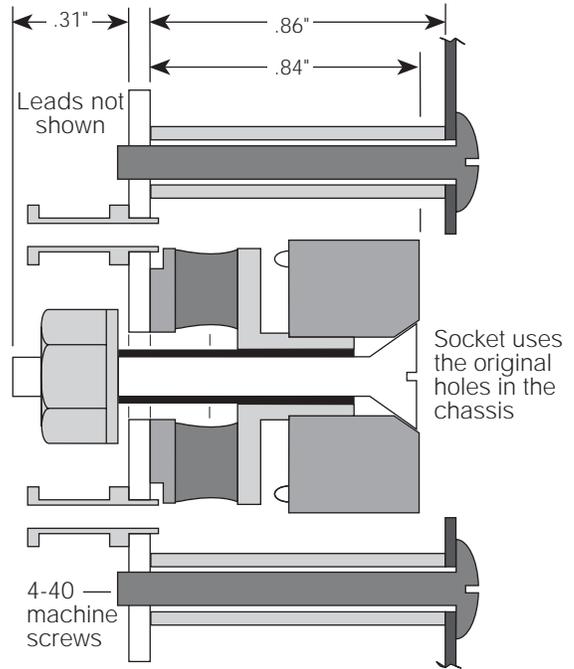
The standard profile, chassis mounting, horizontal ISO-SOCKET is shown above. The contacts are silver plated brass, the socket body is white ceramic and silicone foam is used for the decoupling elastomer. The socket is supplied fully assembled with the flex leads threaded through the holes in but not soldered onto the hollow, turret terminals. Note that the insulation on the leads is solder strippable. See AN 7.1 *ISO-SOCKET Installation Instructions* for complete directions on the method to use to dress the leads.
